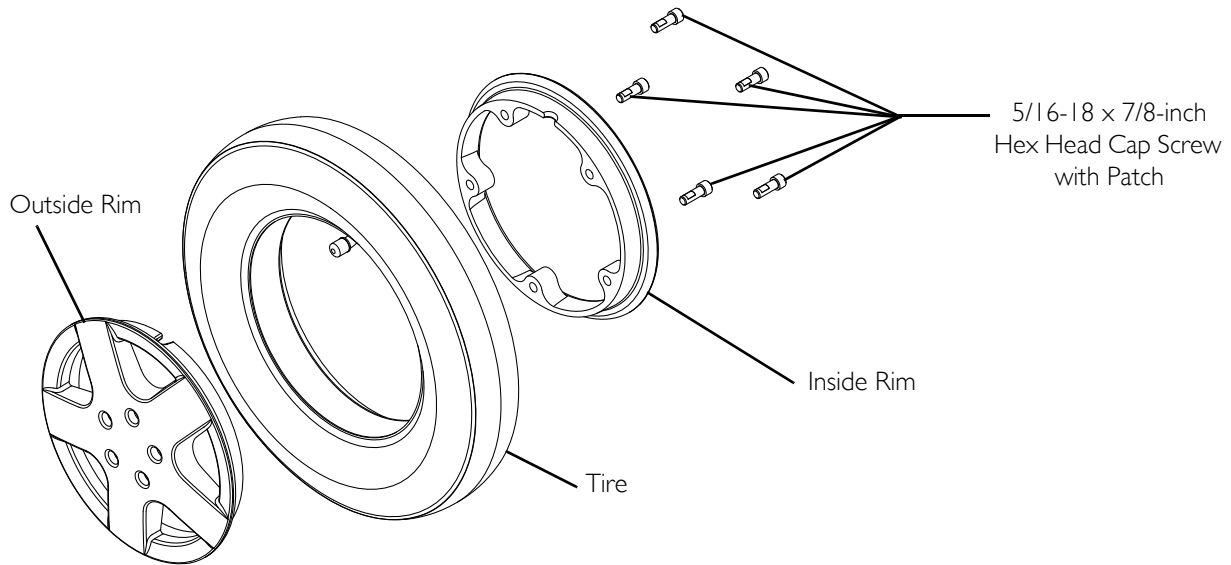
Removing/Installing the Inside Rim and Pneumatic Tire
